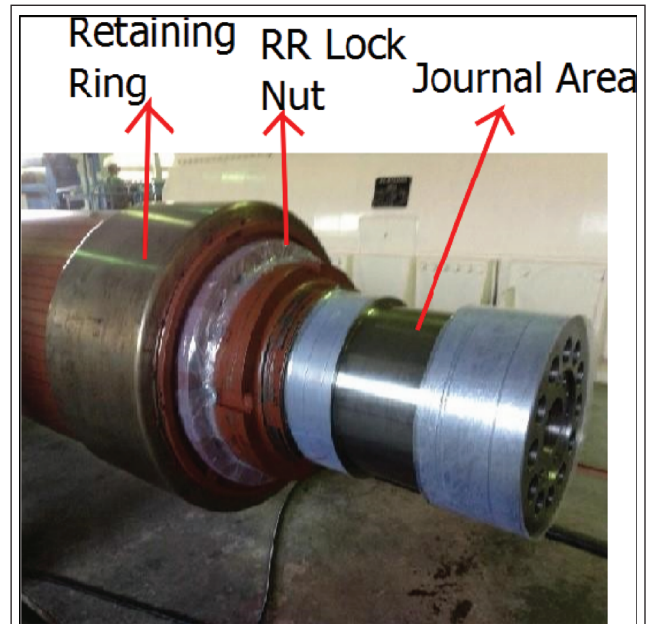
A VIEW OF GENERATOR ROTOR WITH RETAINING RING (DRIVE END)
